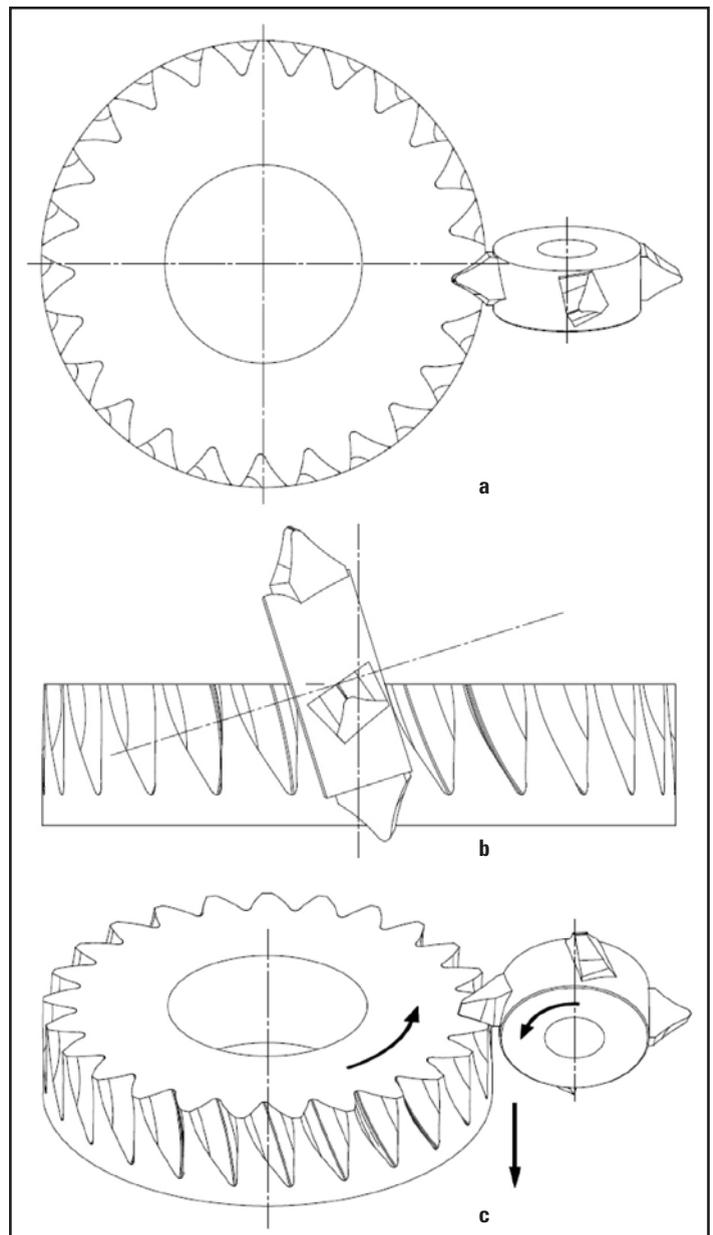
Gear fly cutting schematics: a) top view; b) right view; c) isometric view.
